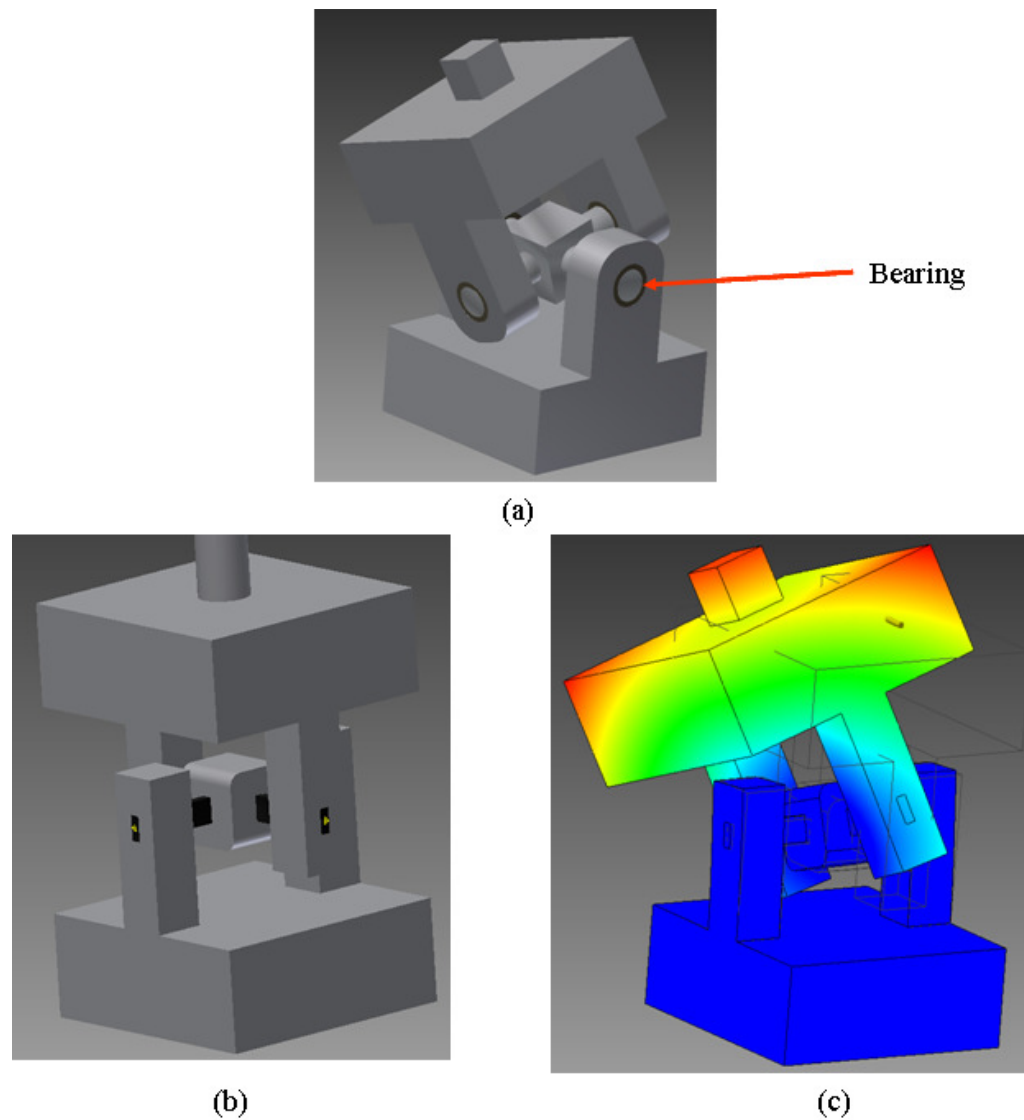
Operation of a universal joint. (a) An ideal universal joint uses bearings to provide smooth rotation. (b) The modified universal joint using flexures instead of bearings. (c) The modified universal joint being twisted.
